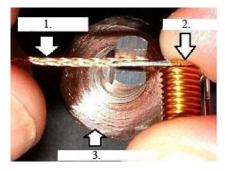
Welding the collector brush wire to the impedance wire: 1 - collector brush wire; 2 - impedance coil; 3 - lower electrode
